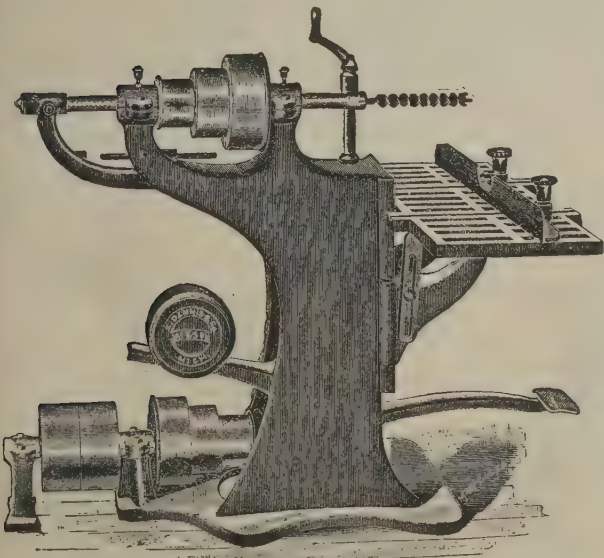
SINGLE SPINDLE, HORIZONTAL BORING MACHINE.
